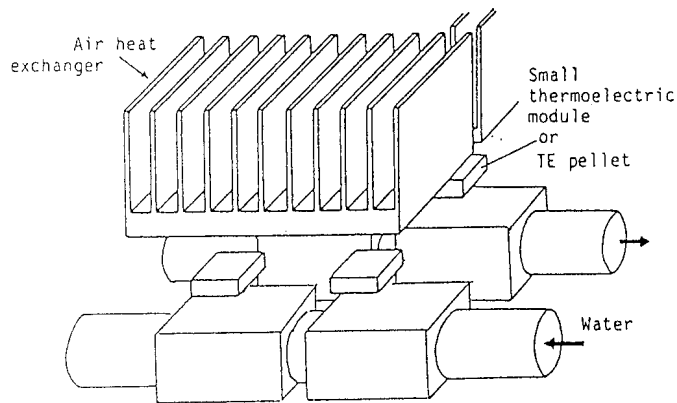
Schematic exploded view of small modules or integrated pellets assembly.
